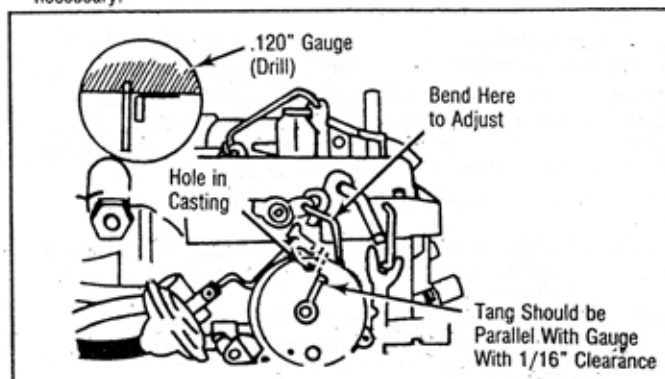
Choke Control Lever Connecting Rod Adjustment (Integral Choke Models Only)
